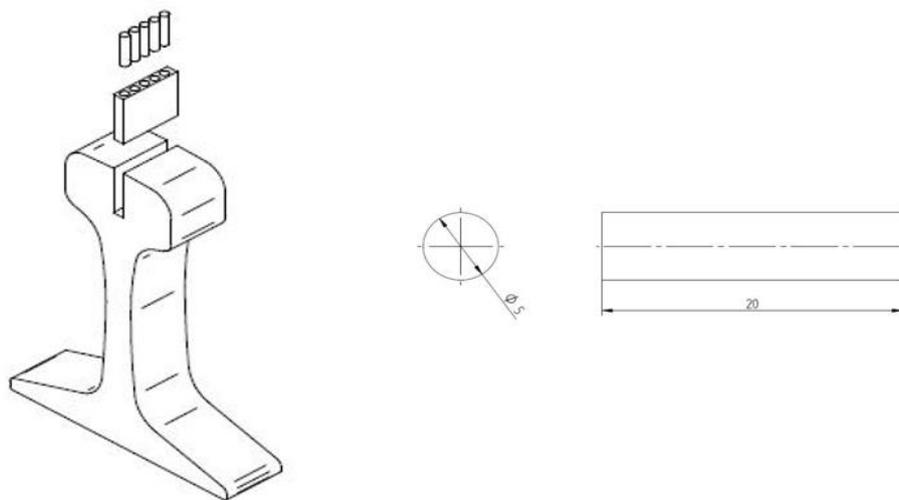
Pin removal arrangement along the billet and dimensions of removed pins in scale-free drawing and dimensions in mm. Source: Adapted from (Almeida *et al.*, 2019).
